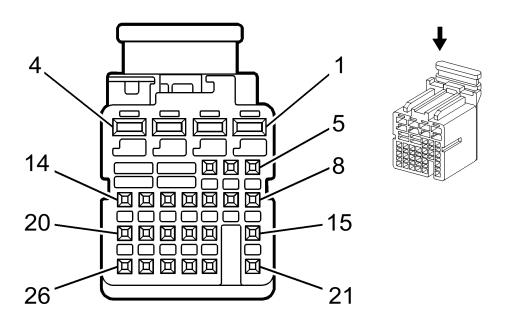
K9 Body Control Module X5 Connector End Views Courtesy of GENERAL MOTORS CORP.
